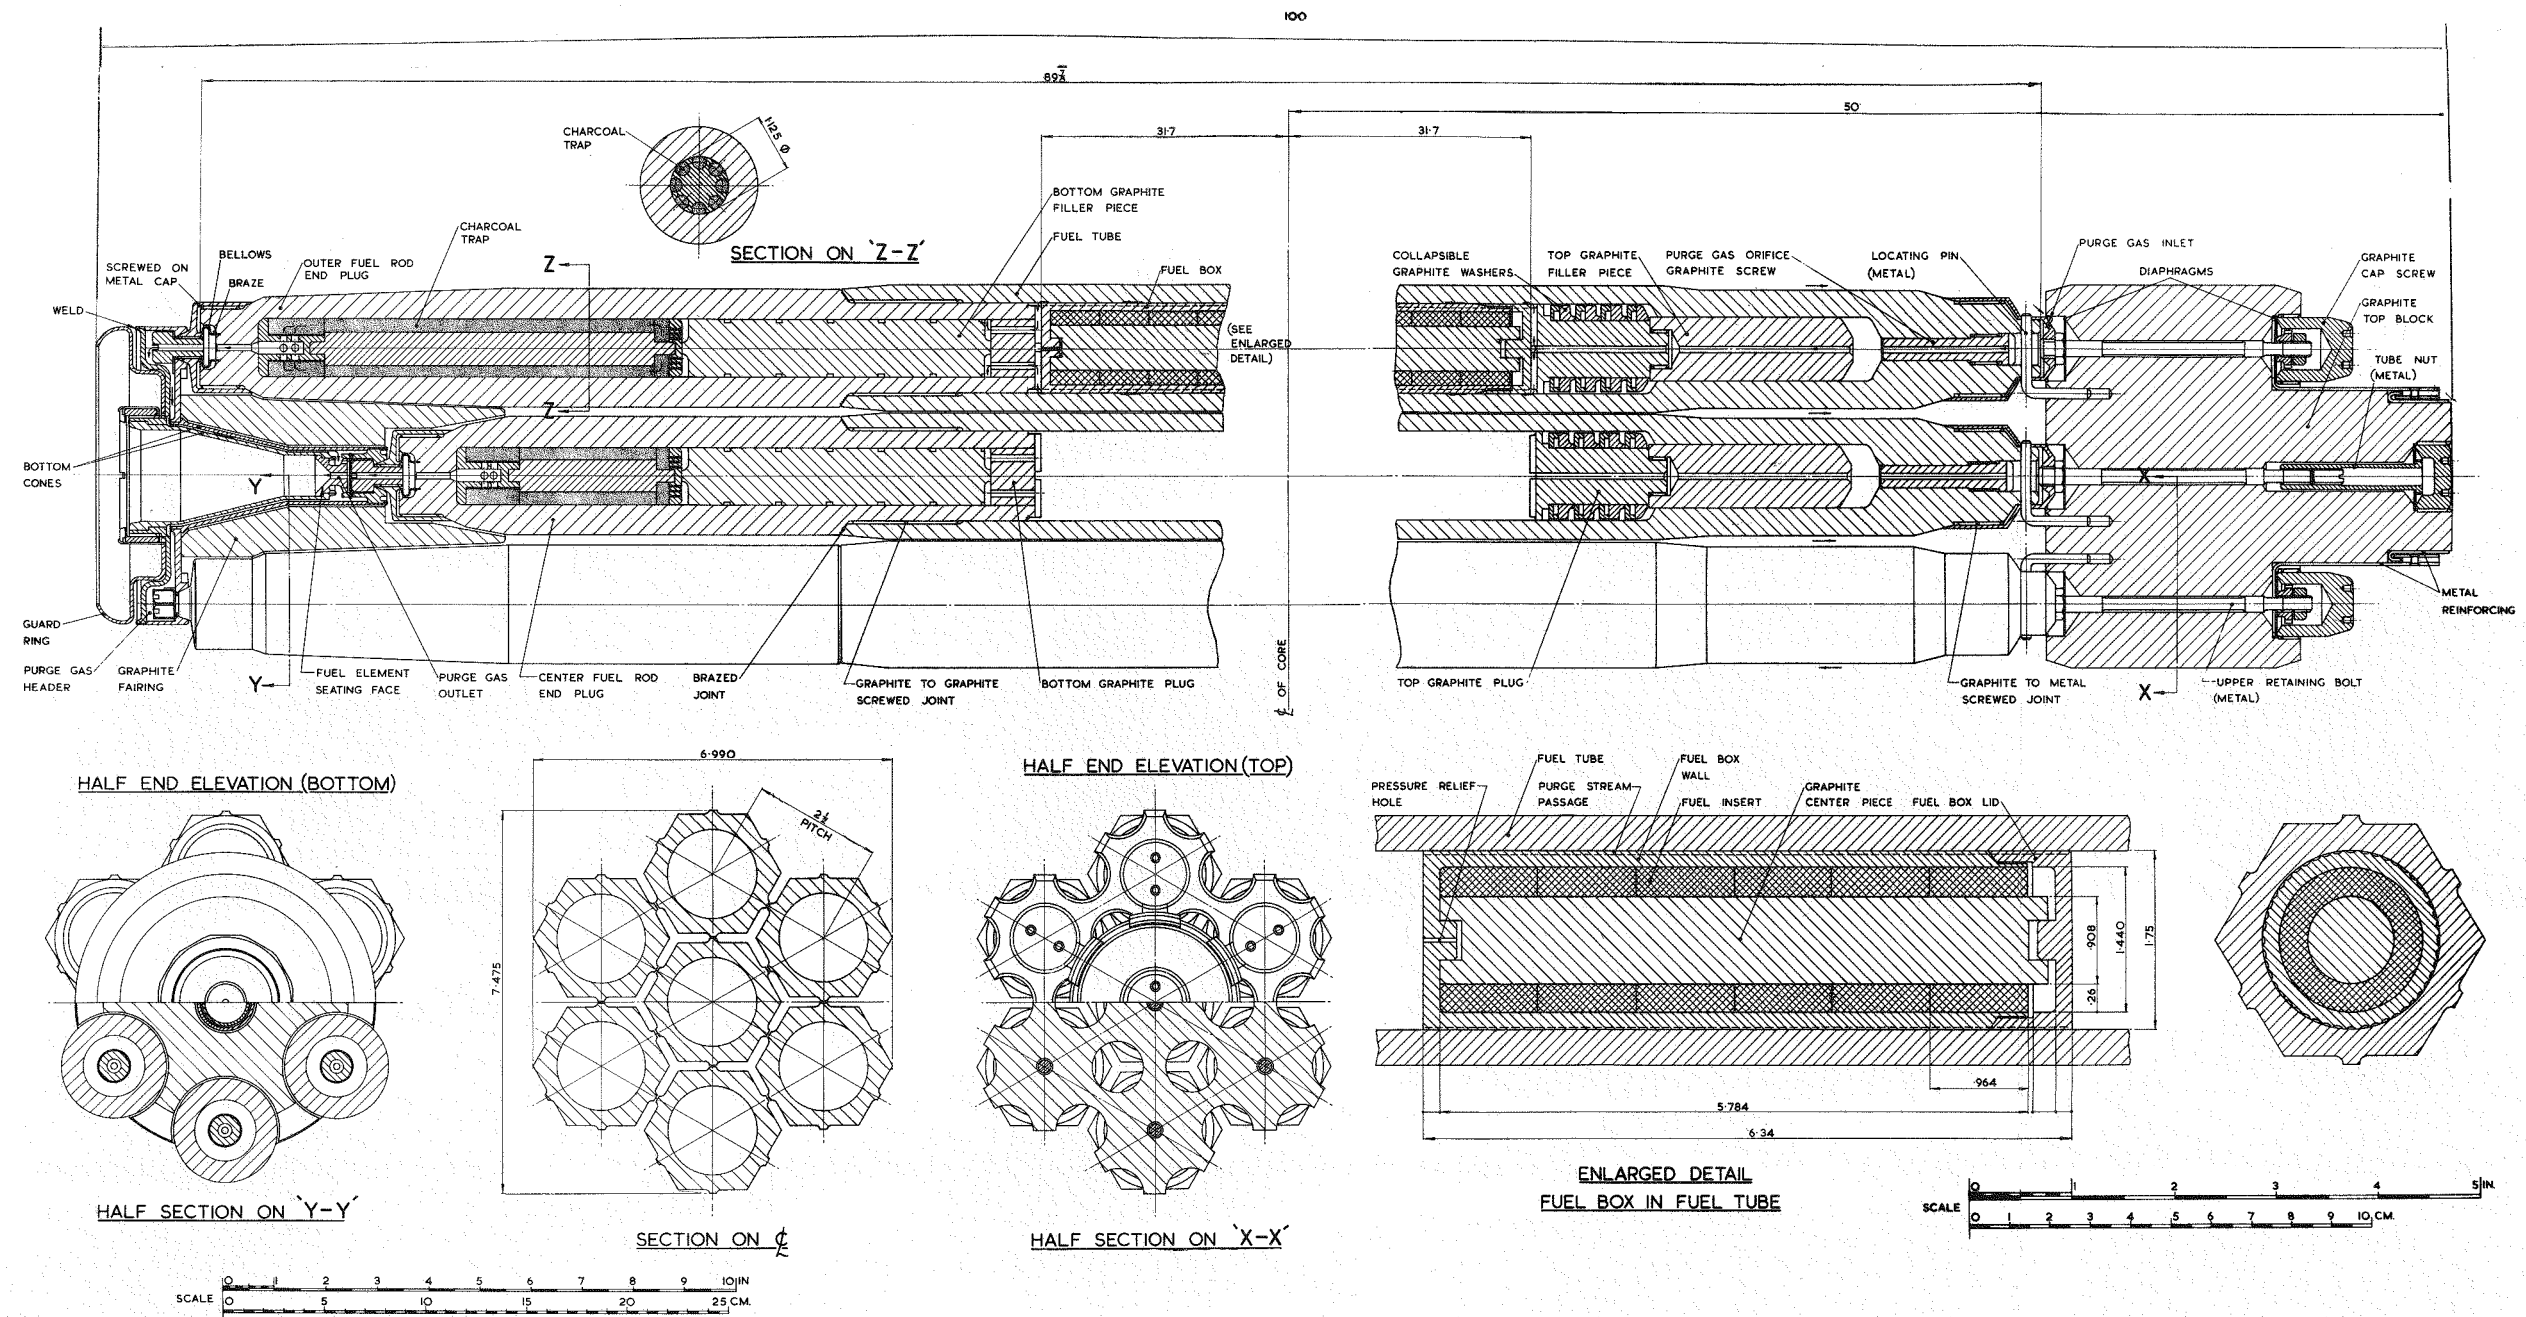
DRAGON FUEL ELEMENT ASSEMBLY MARK IX
